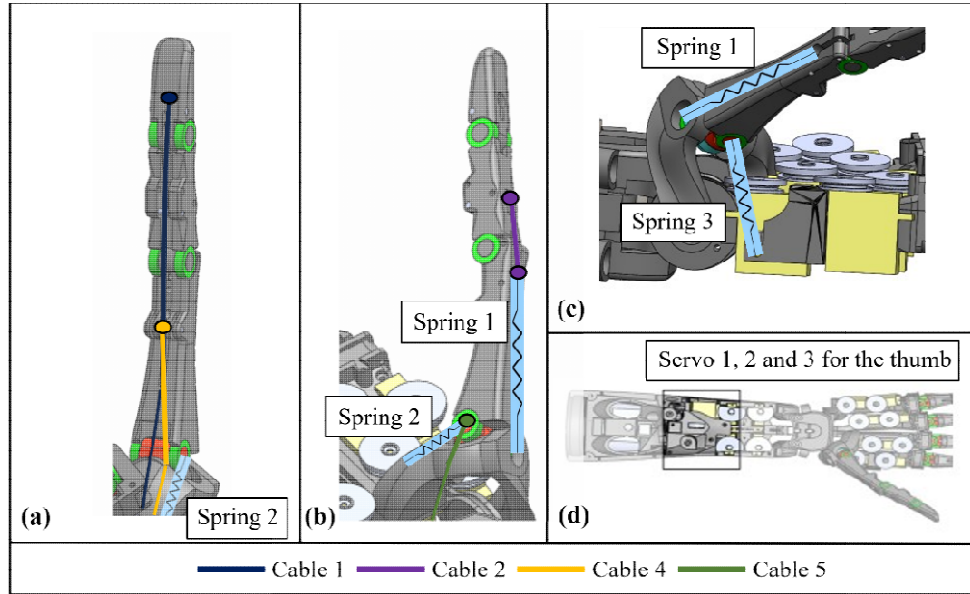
Design of thumb. (a) – (c) Position of cables and springs. (d) Position of servo motors.
